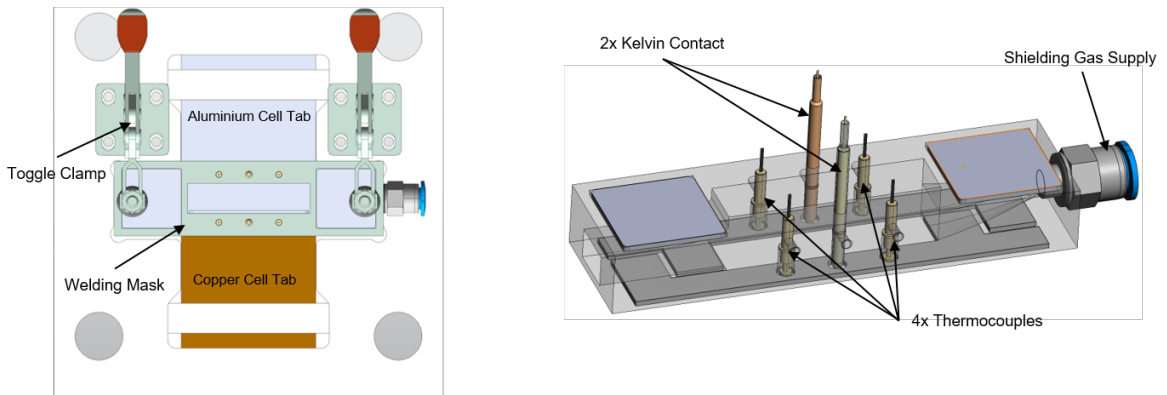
(left) Clamping fixture with integrated sensor technology; (right) detailed view of the welding mask
